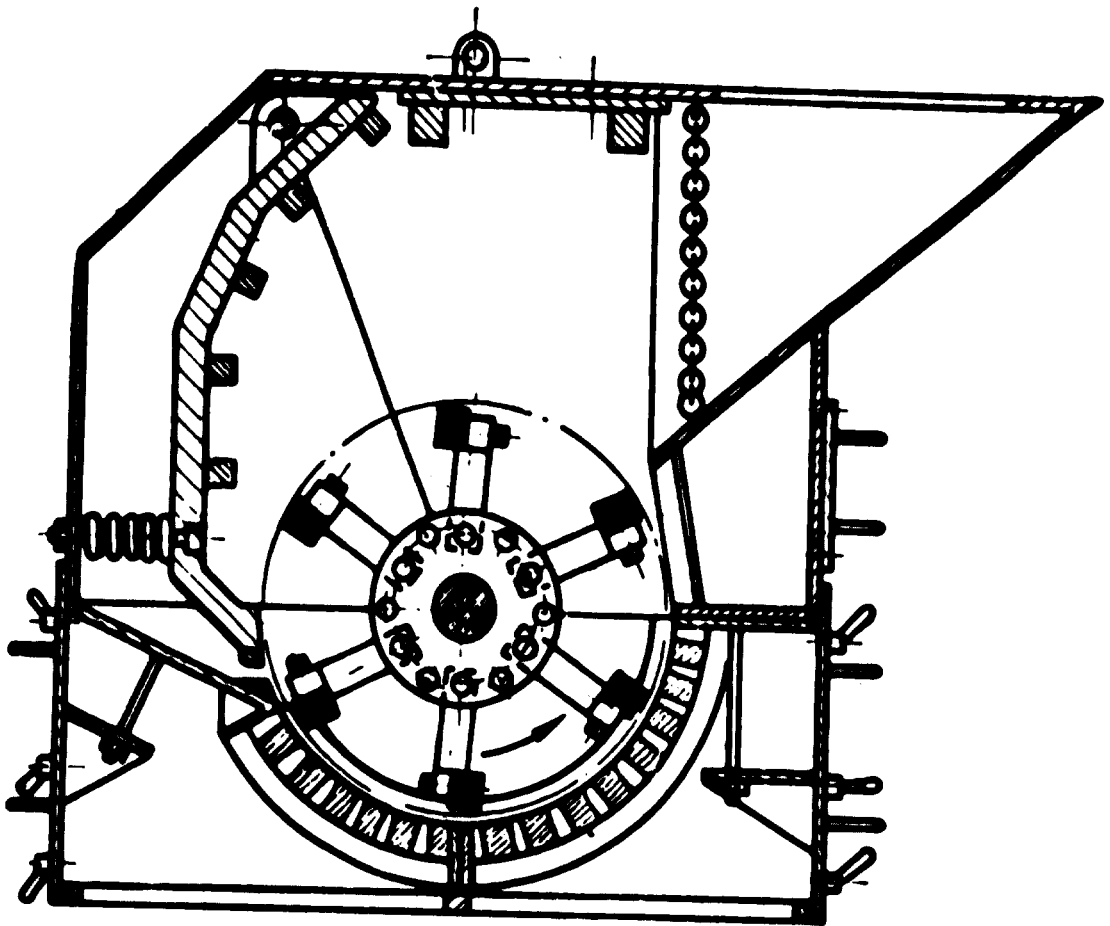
B CROSS SECTION OF HAMMER MILL. (FUCHS),
